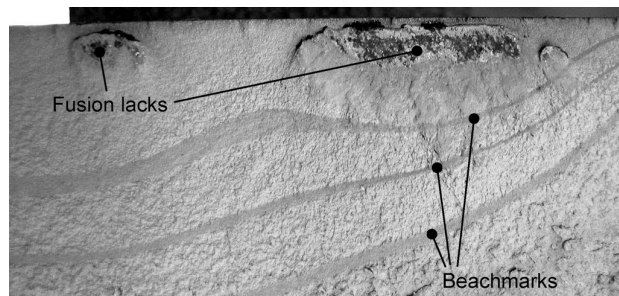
Coalescence of two adjacent near-surface defects in a butt weld
